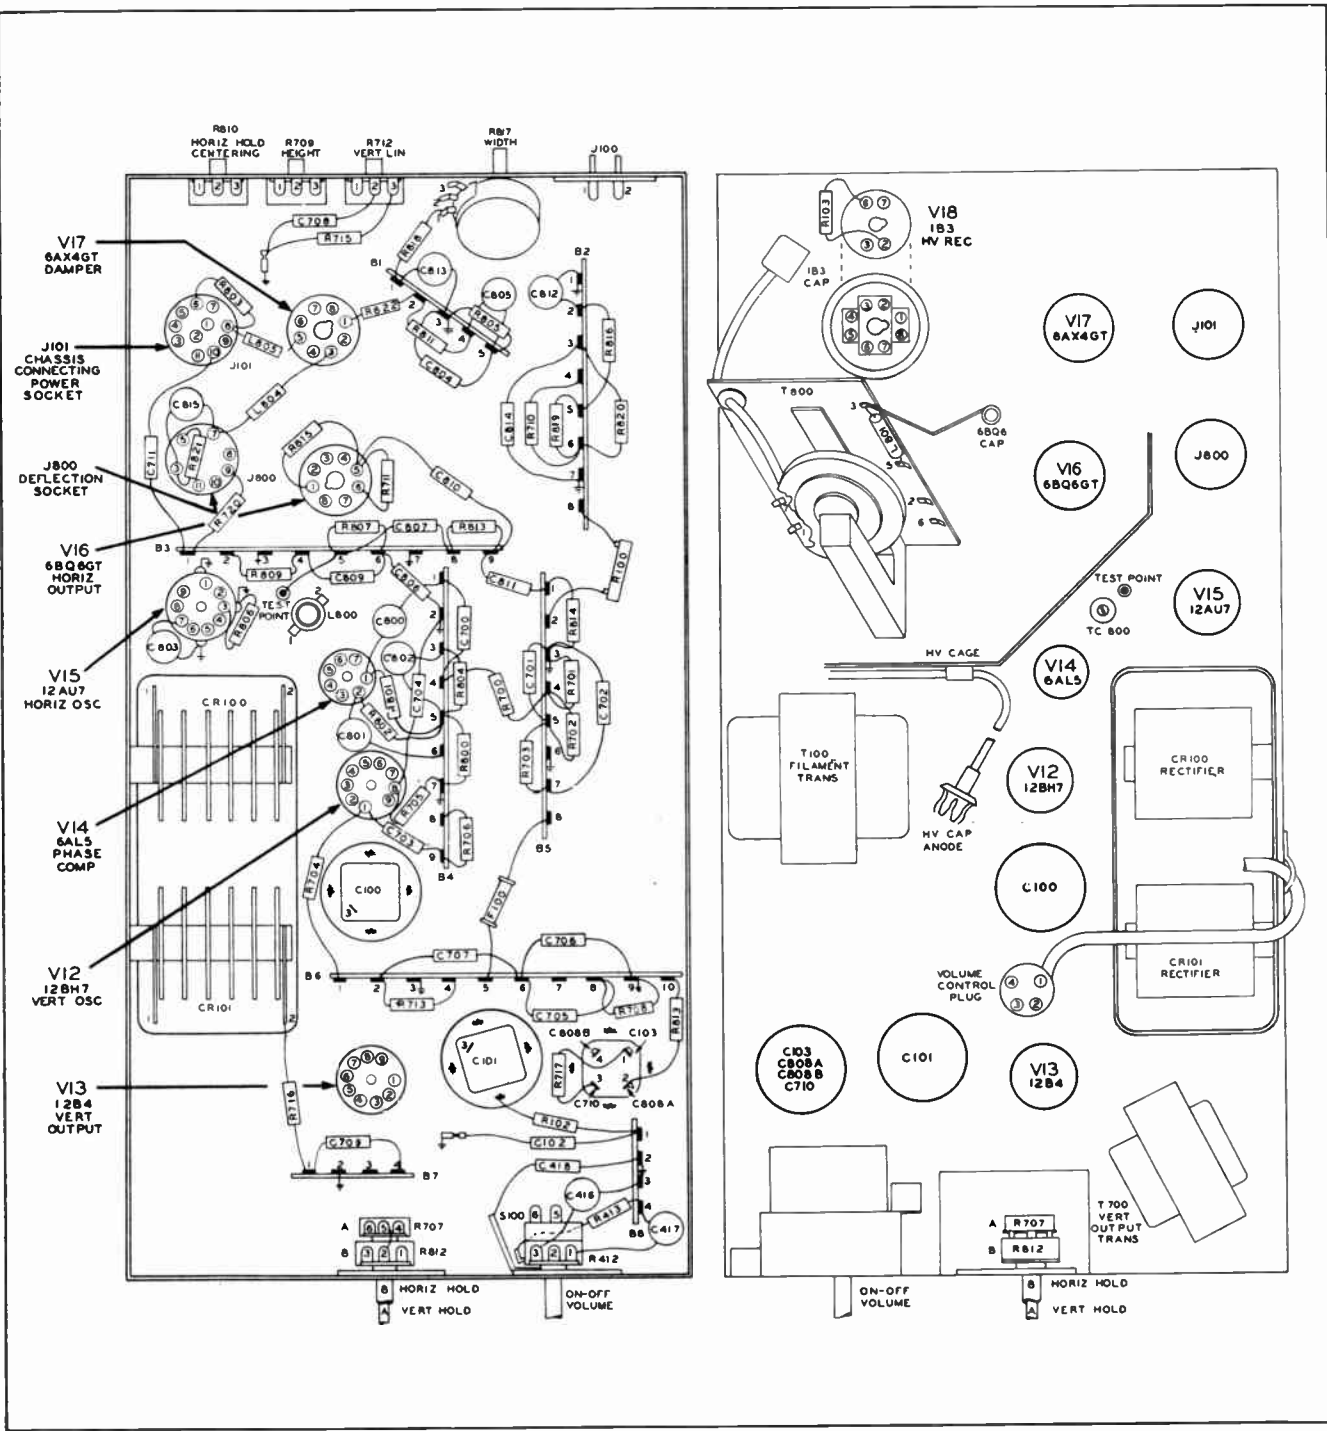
Deflection Chassis D-181, Run 4 (First Production), Base Layout
